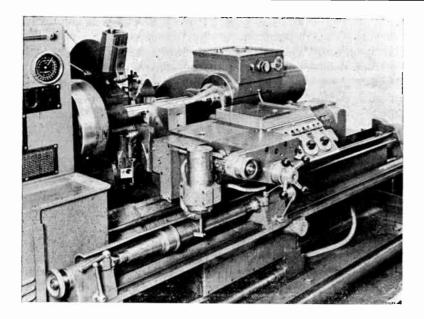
Showing the sensing head with the cover removed. The work is clearly shown, also the method of mounting the tool tip on the end of the stylus rod.
